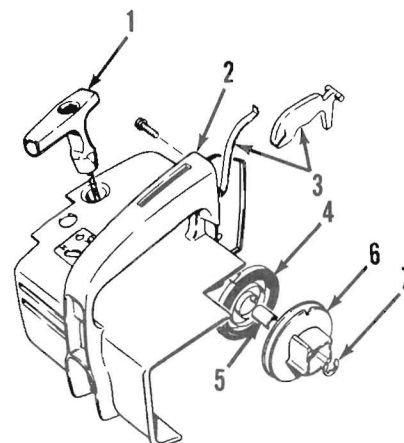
Exploded view of rewind starter assembly used on Models 015, 015L and 015LE.
